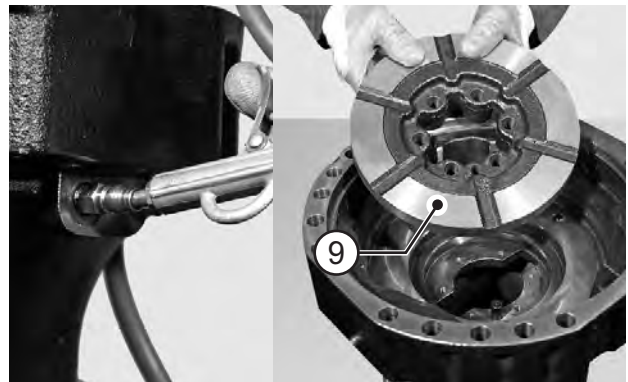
Slowly introduce low-pressure compressed air through the connection member for the service brake (P1), in order to extract the piston (9).
